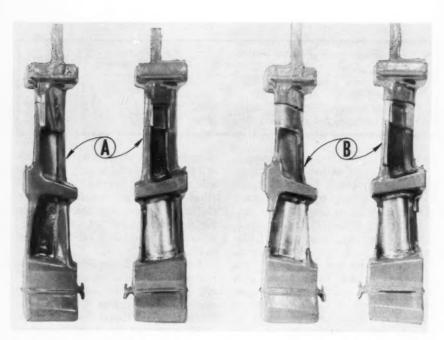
View (A) shows the second step and view (B) shows the third step of the process.
